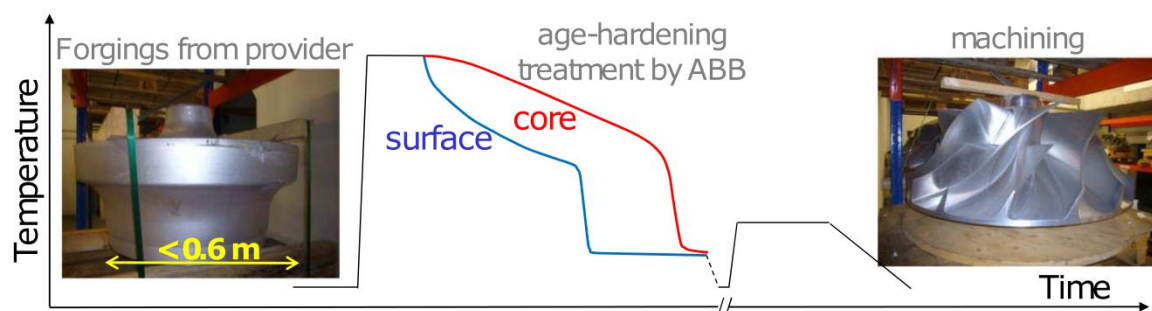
Thermo-mechanical treatment from forgings to impellers performed by ABB (images: courtesy of ABB Turbosystems).
